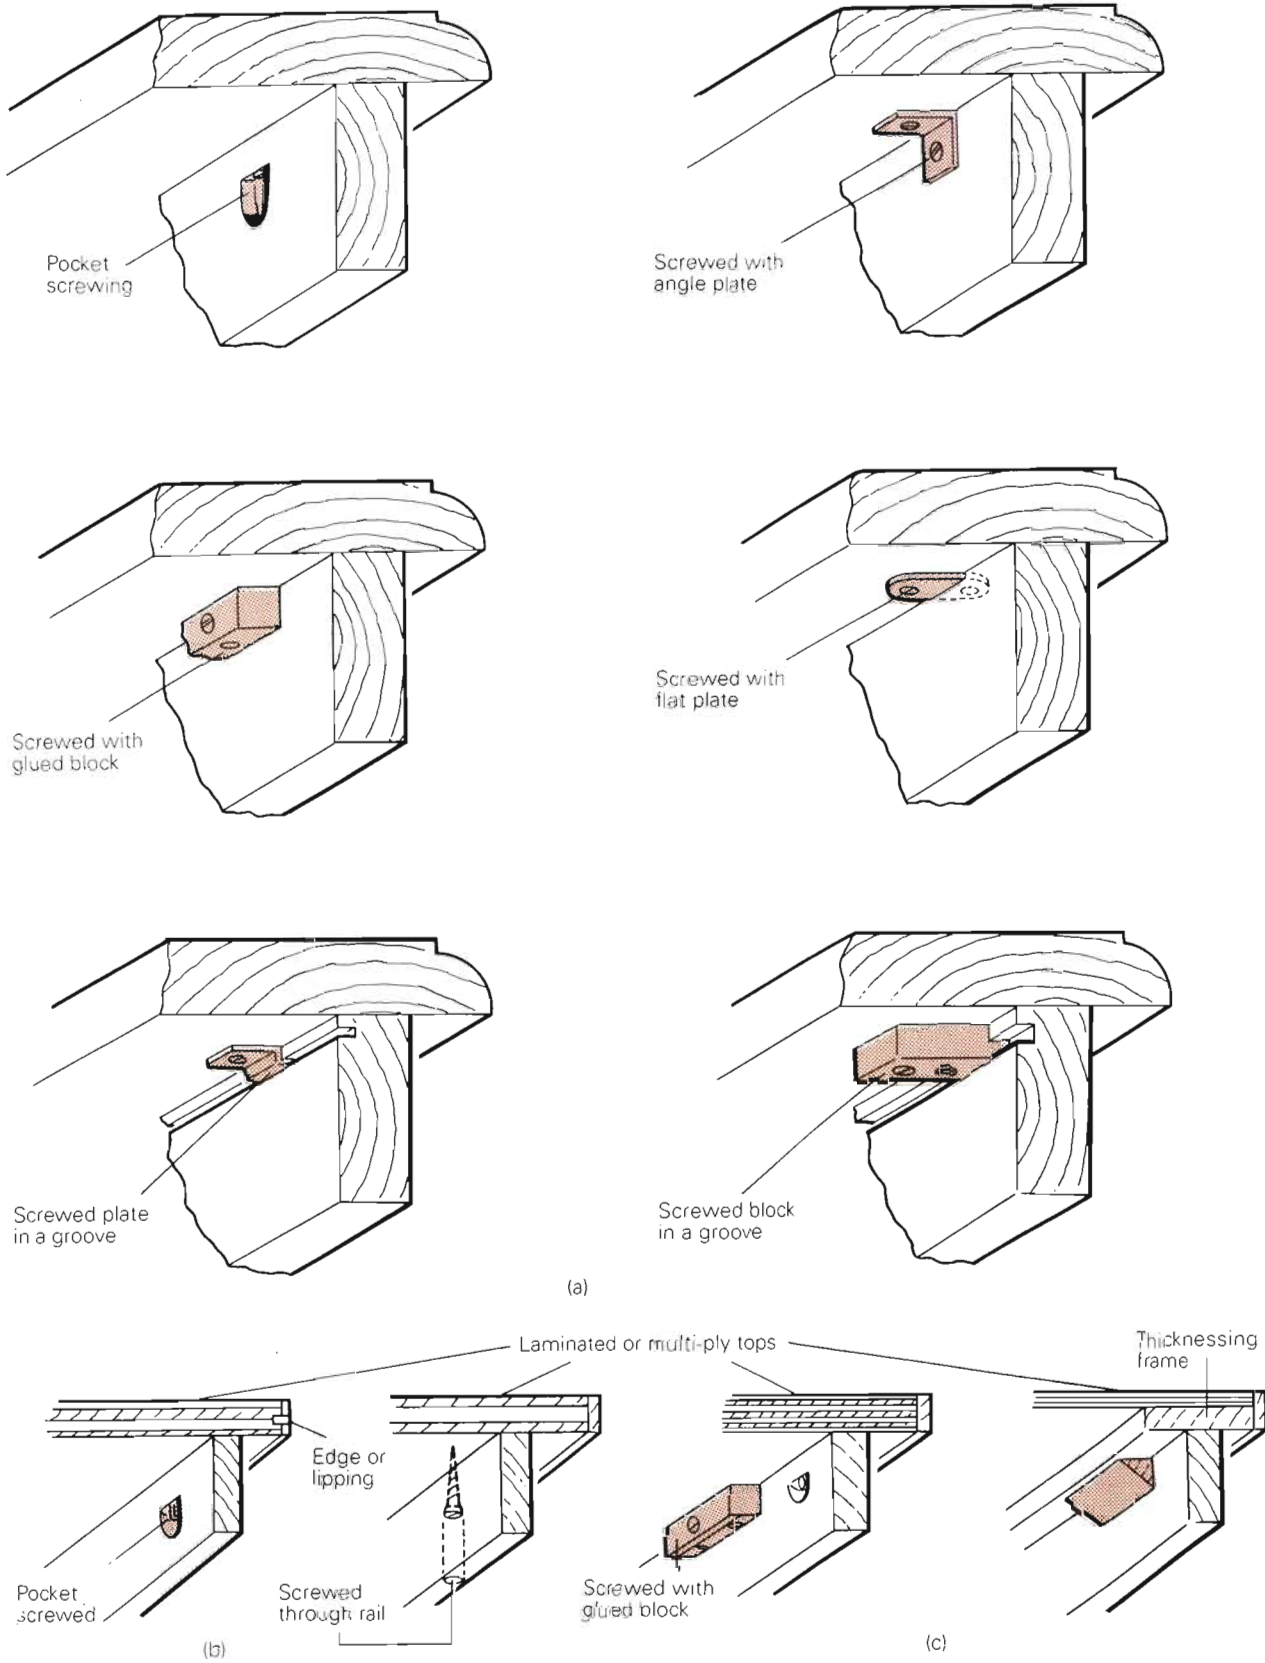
Methods for fixing a table top: (a) solid top, (b) laminated or multi-ply top, (c) 3-ply top.
